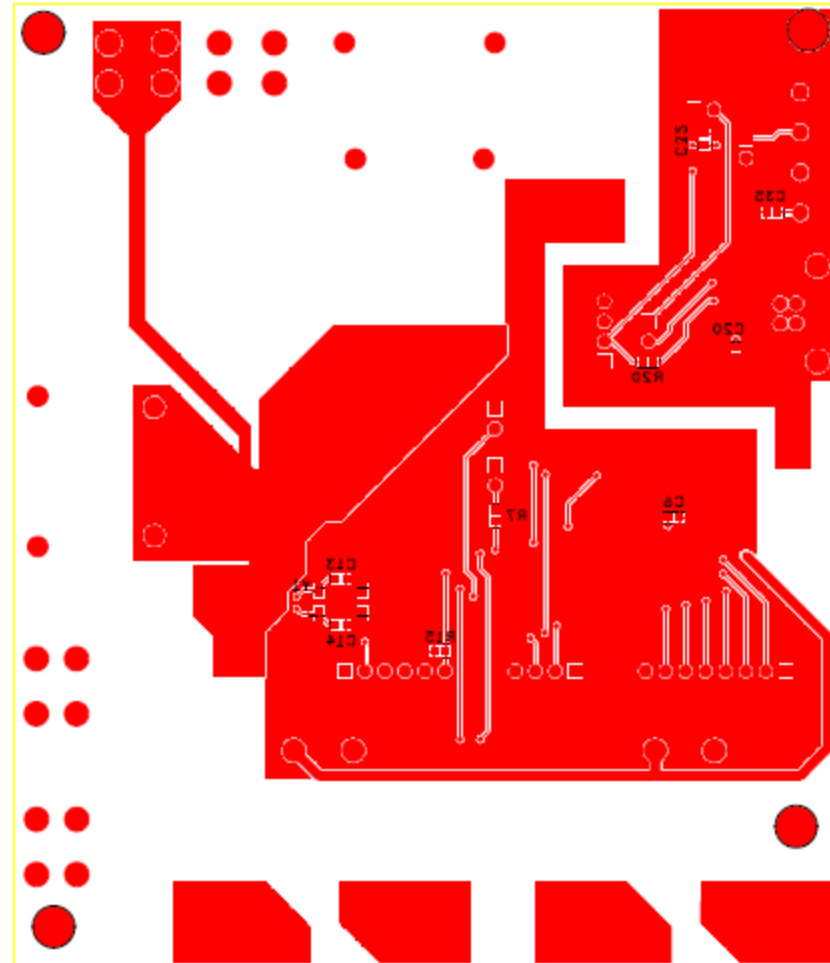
78M6613 Split-Phase Evaluation Board PCB Bottom View
